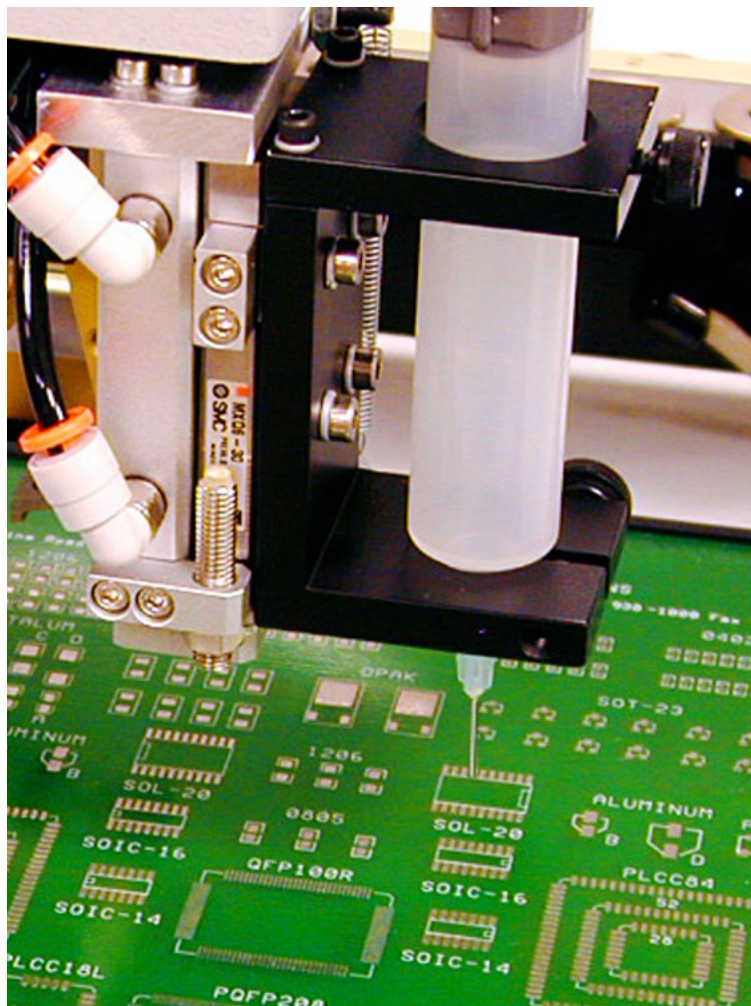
Fluid/solder paste dispenser, typically mounted to the head.
